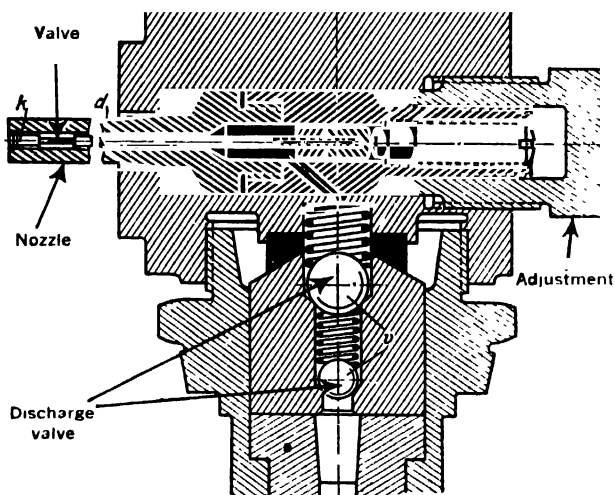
The Dörner Spray Nozzle Which is at the Top of and Adjacent to the Fuel Pump. Relationship of Parts to Pump Shown at Fig. 897.
